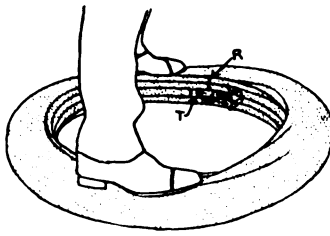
TO APPLY TIRE TO TYPE "E" RIM WITHOUT RIM TOOL
